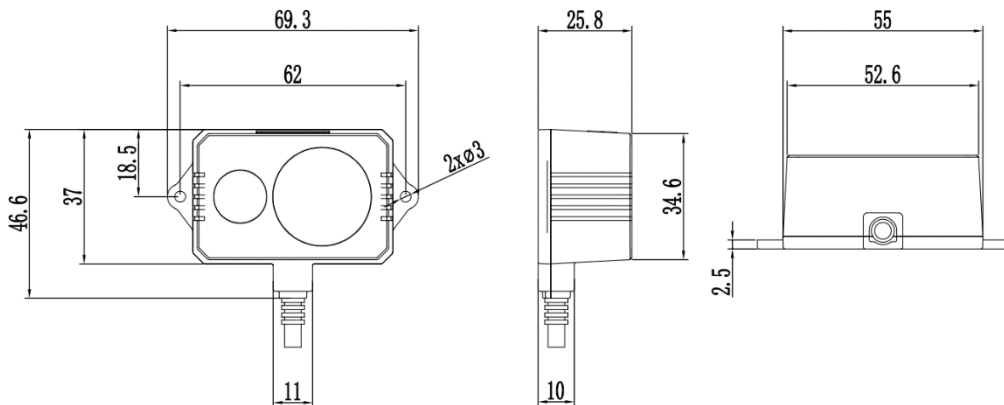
TF02 Dimensions (left 1: front view, left 2: left view, left 3: bottom view)
